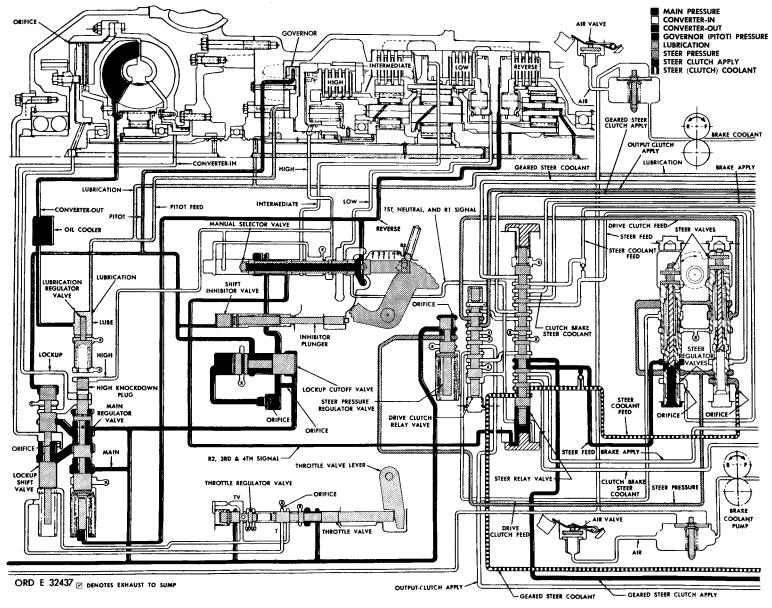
Hydraulic system, reverse 2 gear, left steer — schematic view
